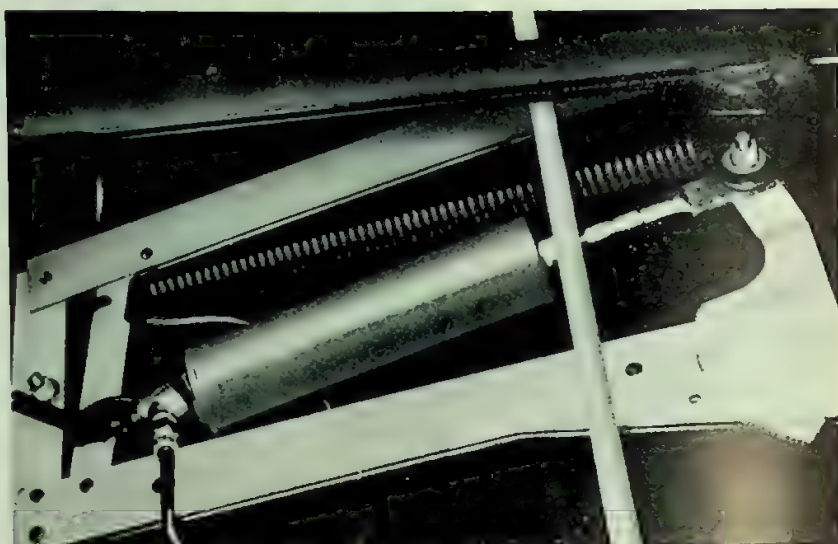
Before Removing Front Seat Regulator Assembly, Both Nuts Shown Must Be Removed.
